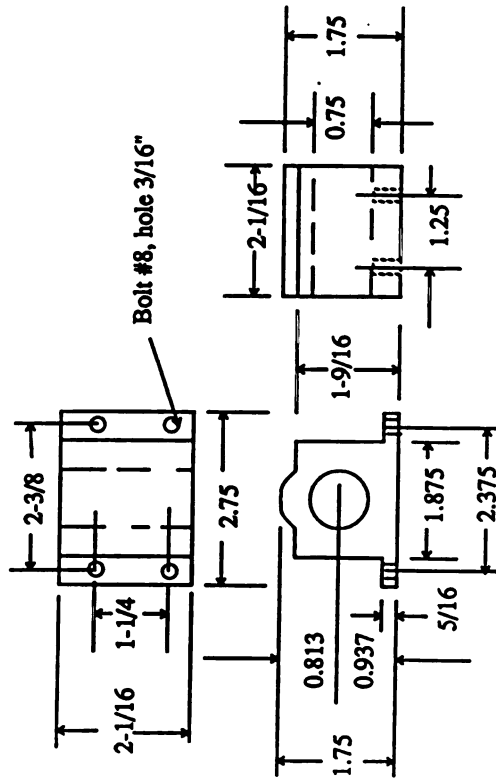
Thomson Super Ball Bushing Bearing SPB-12
